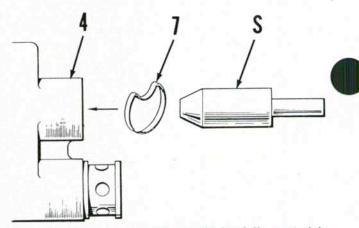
Slipper seals (7) should be fully seated in coupler housing grooves using a wedge shaped tool (S) prior to installing coupler in housing.
